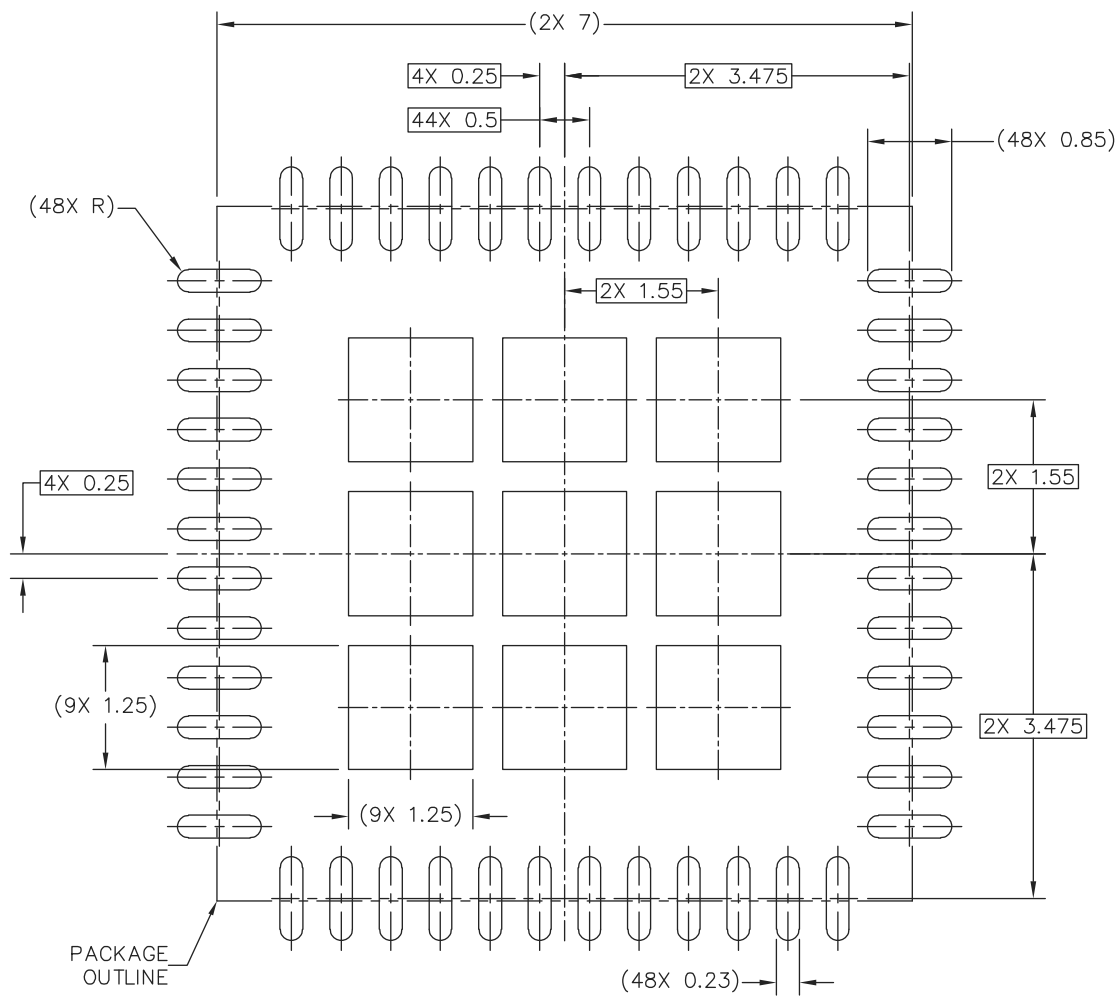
Package outline HVQFN48 7 x 7x 0.85 mm (SOT619-1)
